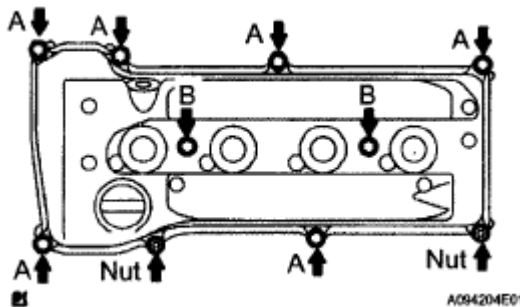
Locating Cylinder Head Cover Bolts And Nuts
